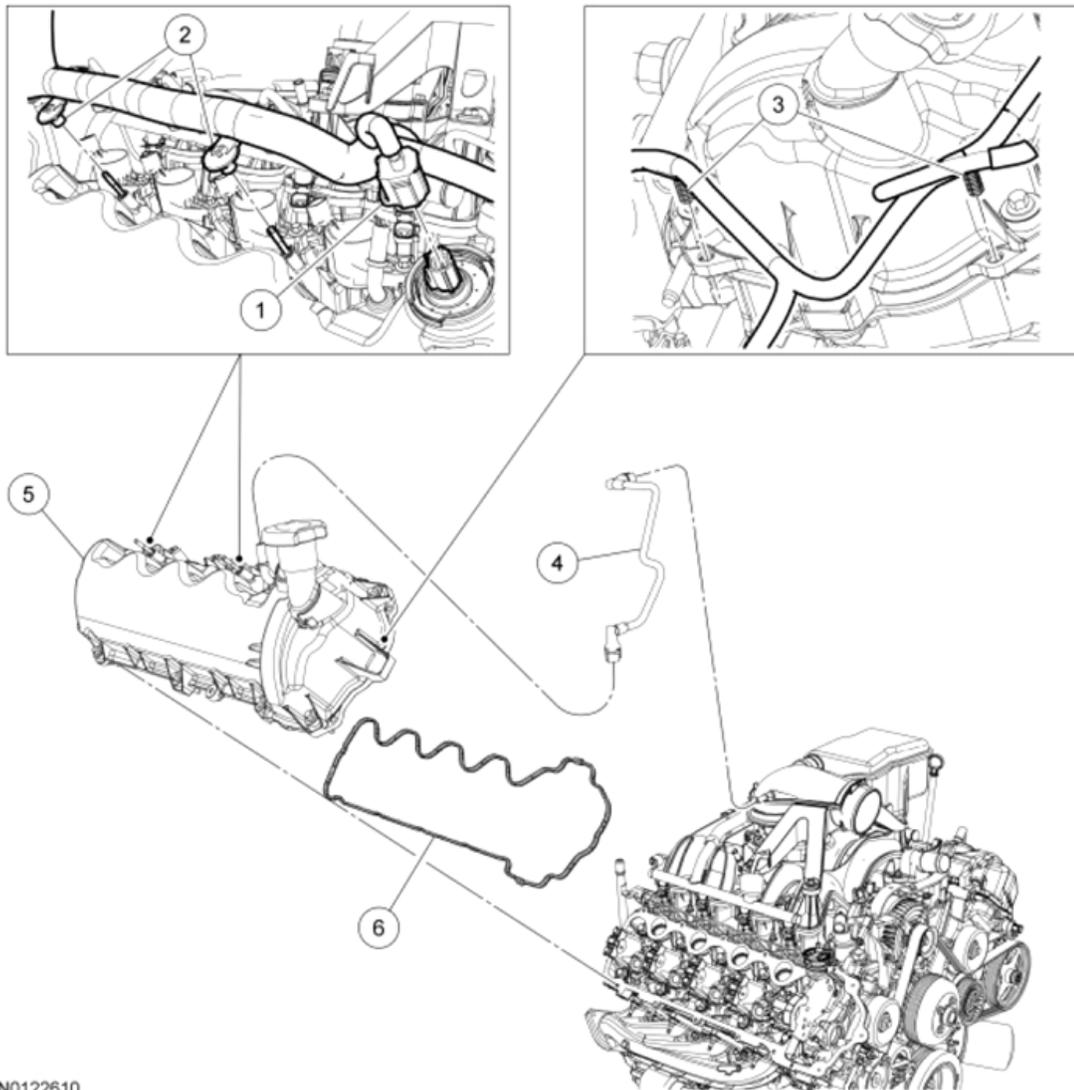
Exploded View Of Engine Wiring Harness Retainers, VCT Solenoid Electrical Connector, Crankcase Ventilation Tube, RH Valve Cover And Gasket
